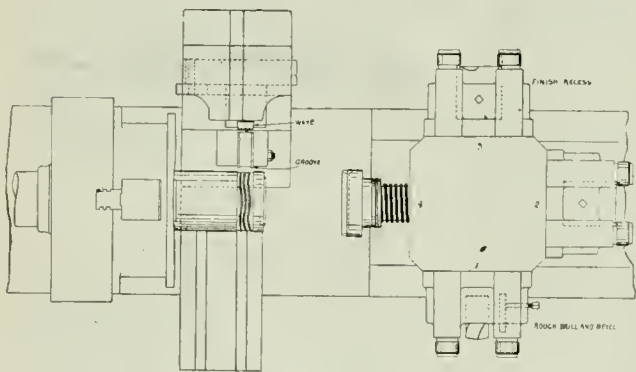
LAYOUT OF TOOLS IN FIG. 10. SHELL IS SHOWN READY FOR REMOVAL.
